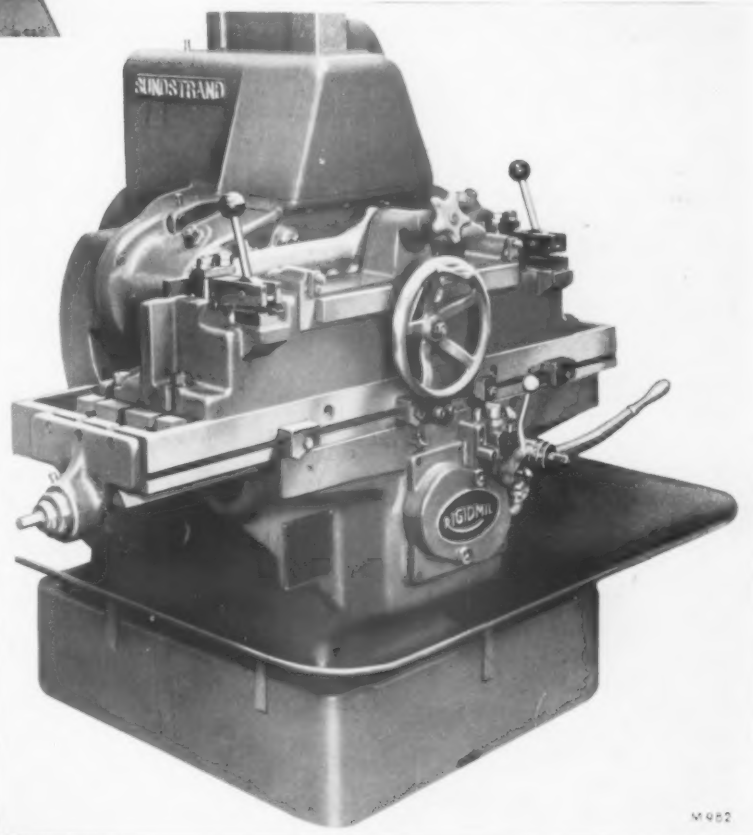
Rigidmil with five-spindle head and fixture for milling exhaust manifolds.
